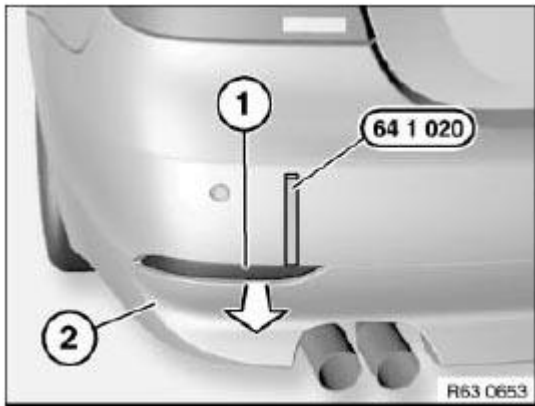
Identifying Special Tool (64 1 020) And Reflector
